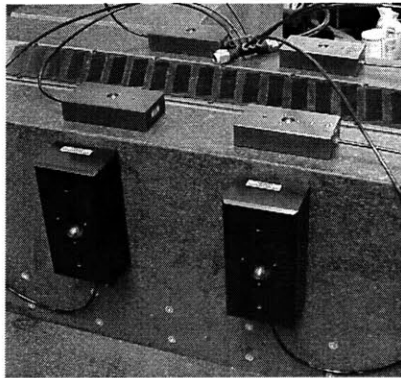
Testing the vacuum system ensures that there are no leaks in the air system prior to squirting the epoxy. Notice the side bearing pads clamped to the way by the vacuum.
